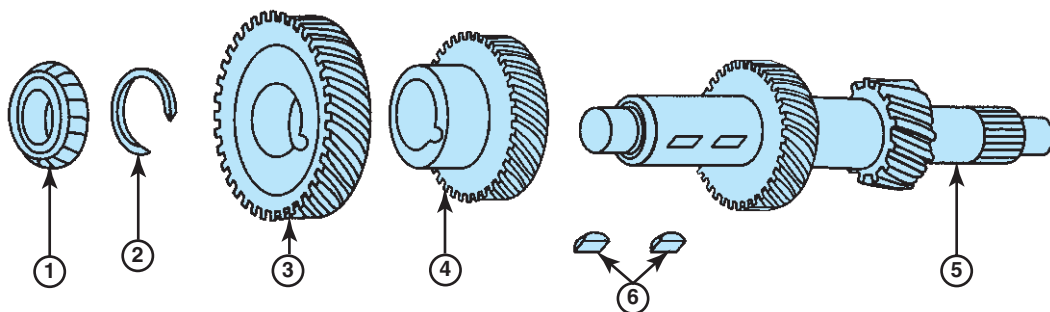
Two gears, the input (3) and third (4), are press fit onto the cluster gear for a TR-3550 transmission.
